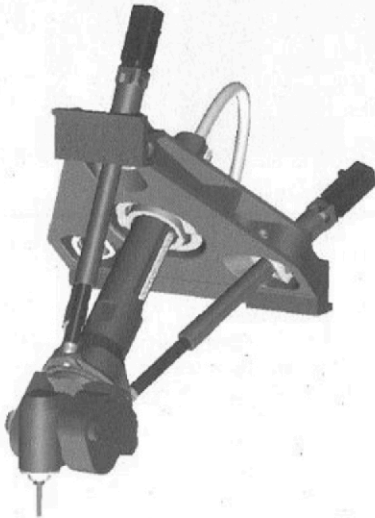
DECKEL MAHO TriCenter DMT100 5-axis hybrid machining [51]
